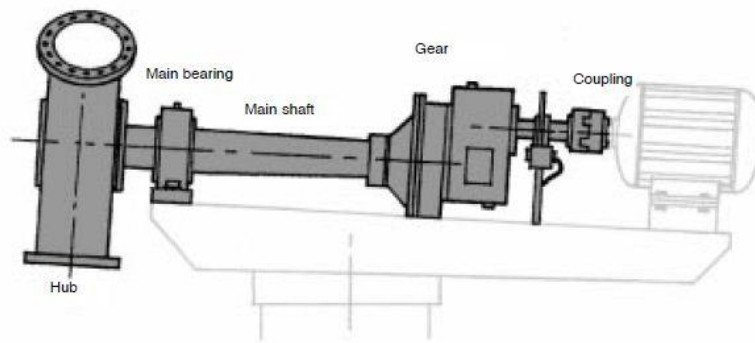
Wind turbine shaft showing link between the wind turbines blades and generator.
